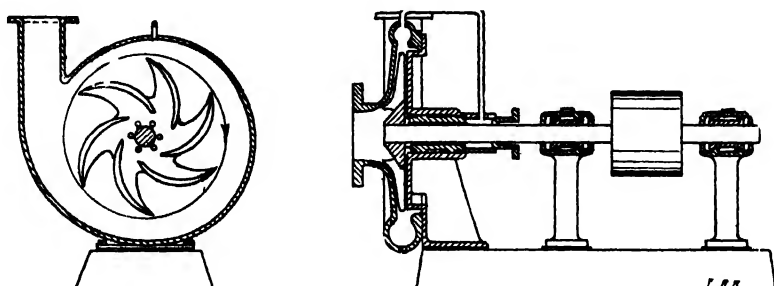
A centrifugal pump, single-stage, open-impeller type.
